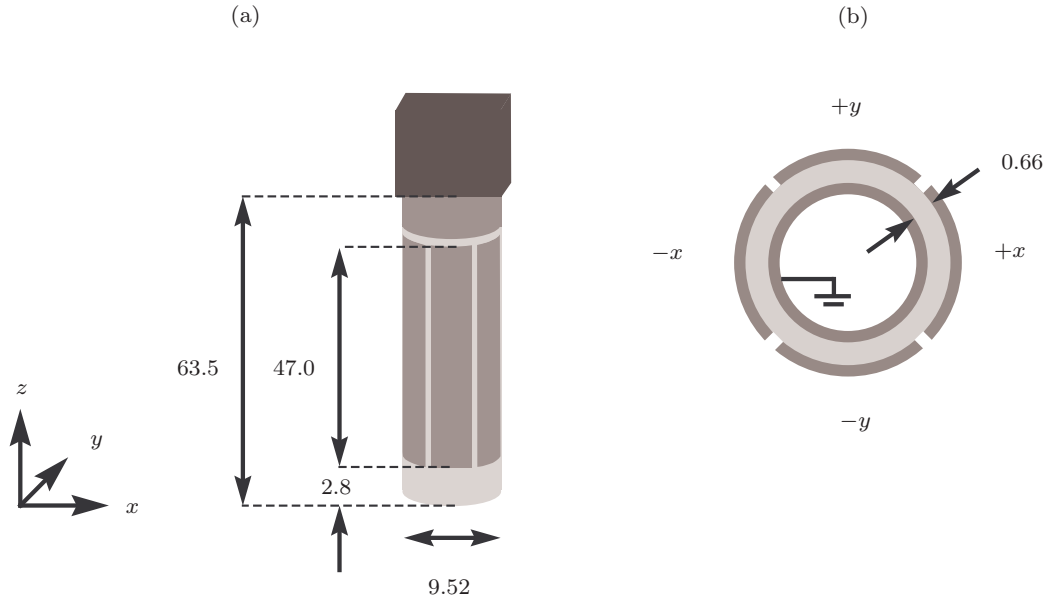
Piezoelectric tube dimensions in millimeters. (a) Isometric-view and (b) Bottom-view (dimensions are not to the scale and the thickness of the electrode is exaggerated).
